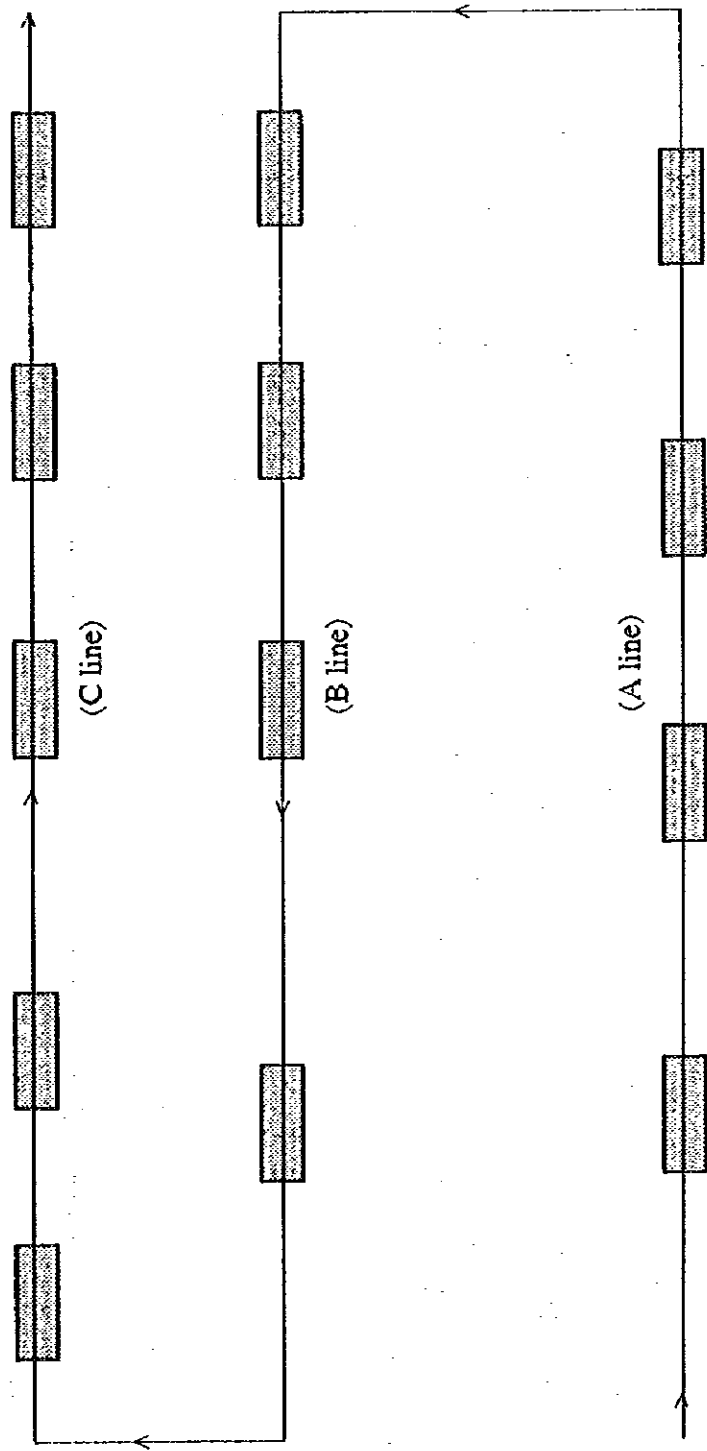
Equipment Layout of Cylinder Block Machining Lines
